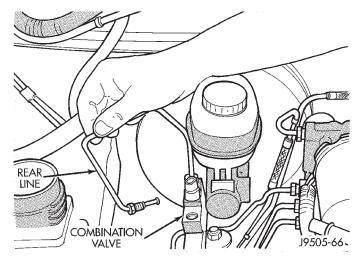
Disconnecting Master Cylinder Rear Brakeline
